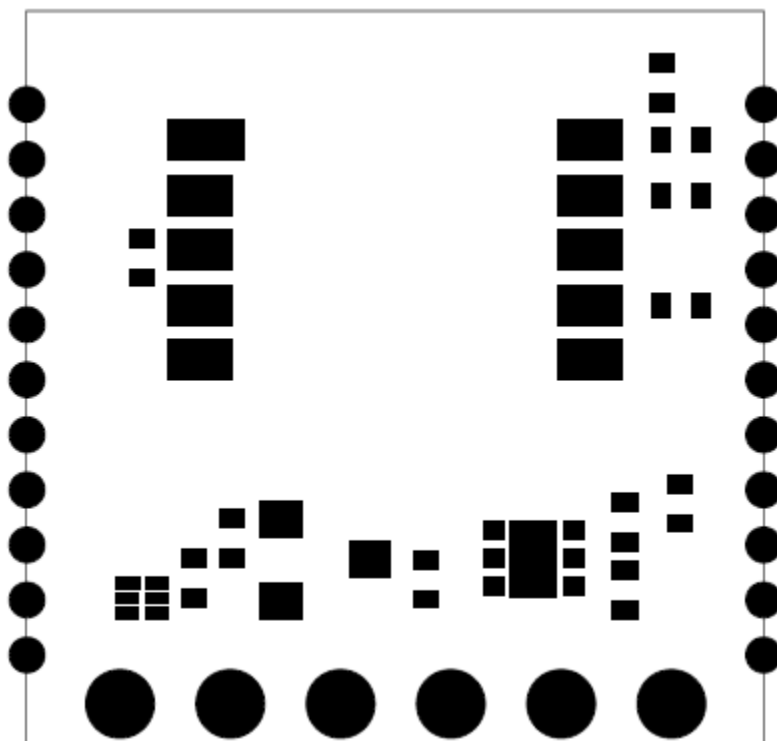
INTERFACE ADAPTOR BOARD SOLDER MASK
